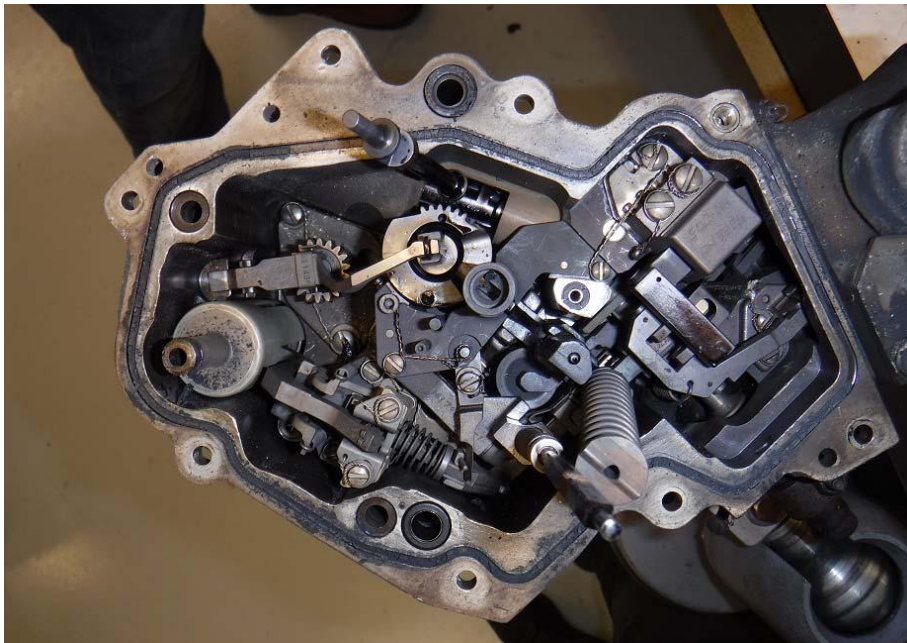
The internal components of the No. 2 fuel control after removal of the cover.
